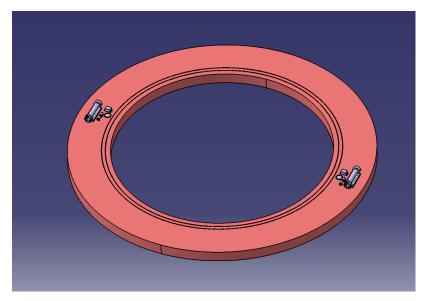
1-stage Cryocooler Mount CAD Assembly
